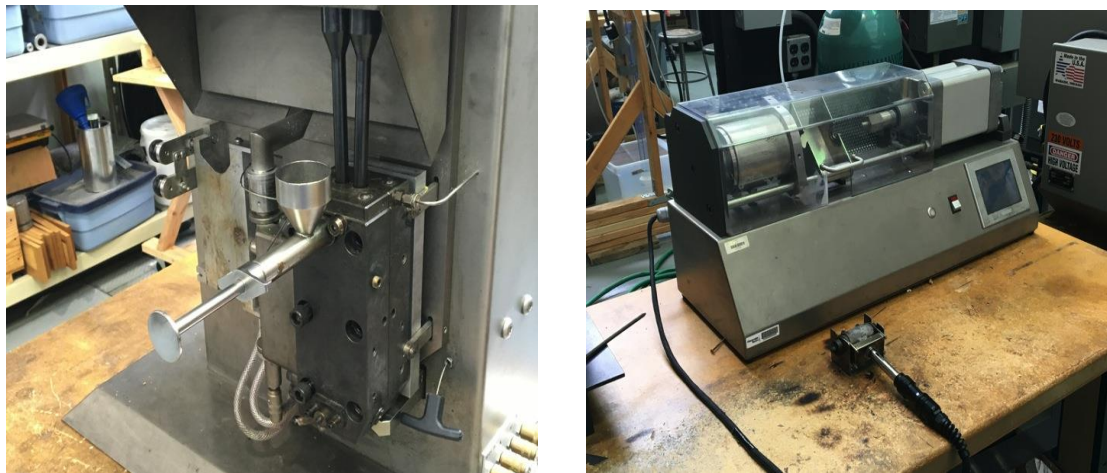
Micro extrusion (left) & injection molding unit with transfer gun (right)
